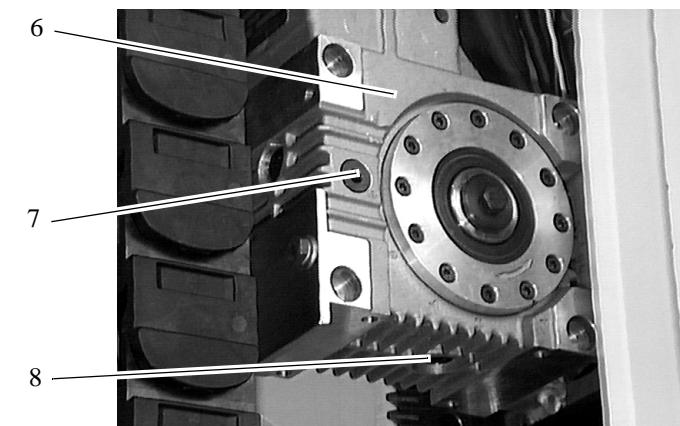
0 Gearing of Axis 6 (V-Axis)
